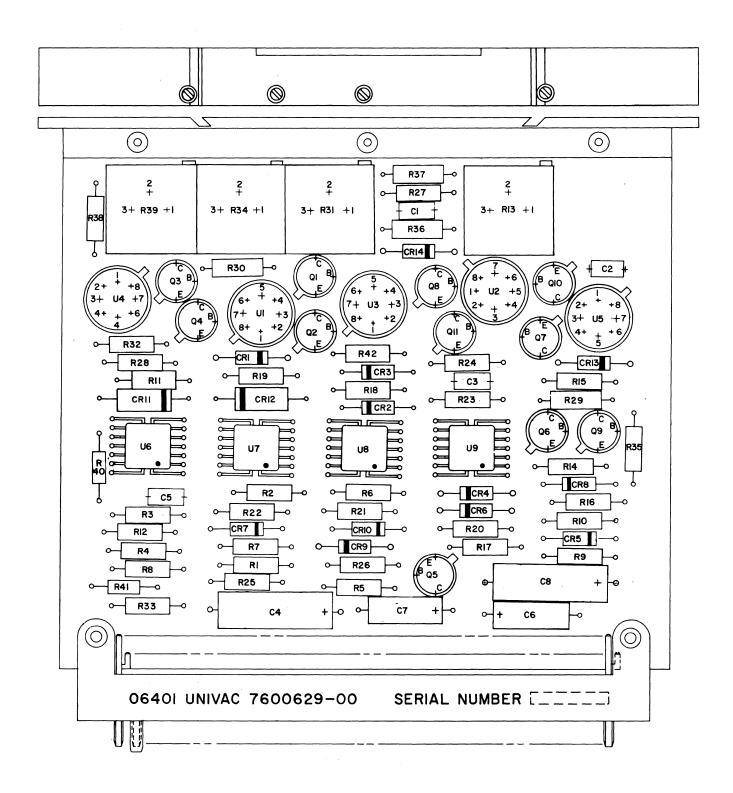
Reel Servo Output Circuit Card Assembly (7600629)
